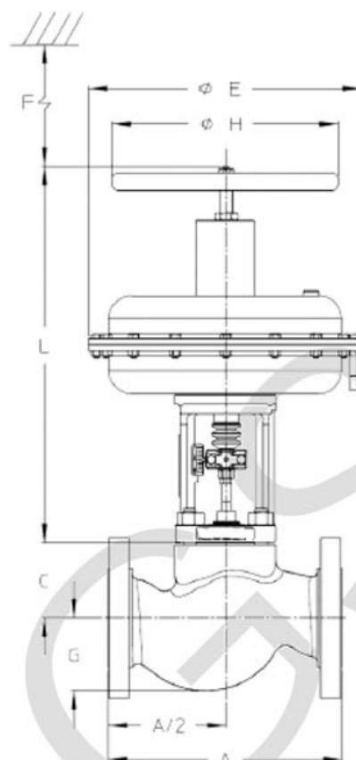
MK-GS Valve Pneumatic Close Top-mounted Handwheel Dimension Drawing
